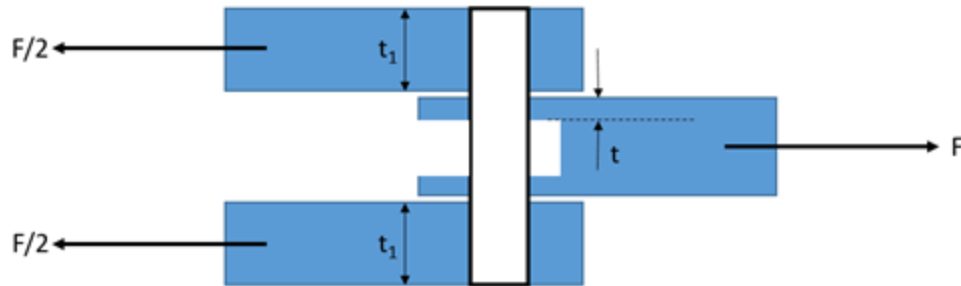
Free Body Diagram of the Forces on the Pin in the Double Bearing Pin Joints
